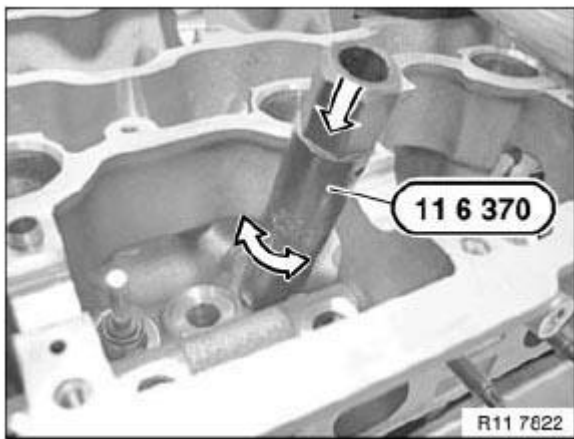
Pressing Special Tool Onto Valve Stem Seal
